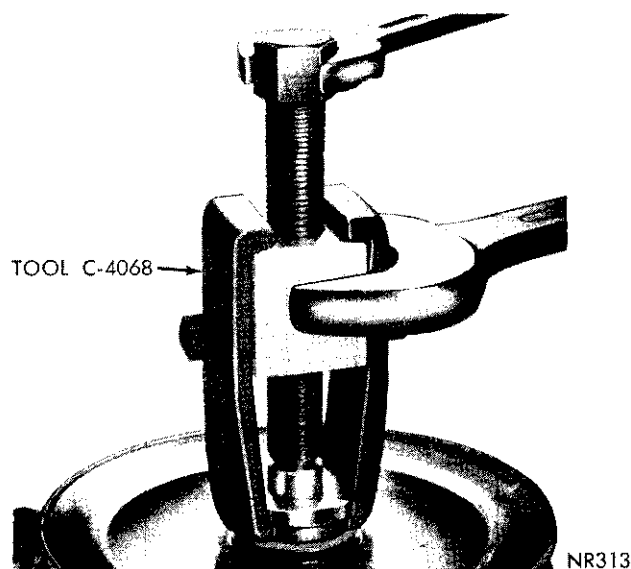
Removing Drive Pulley (1.06 Pump) or score marks that would allow oil to by-pass outer seal surface.
